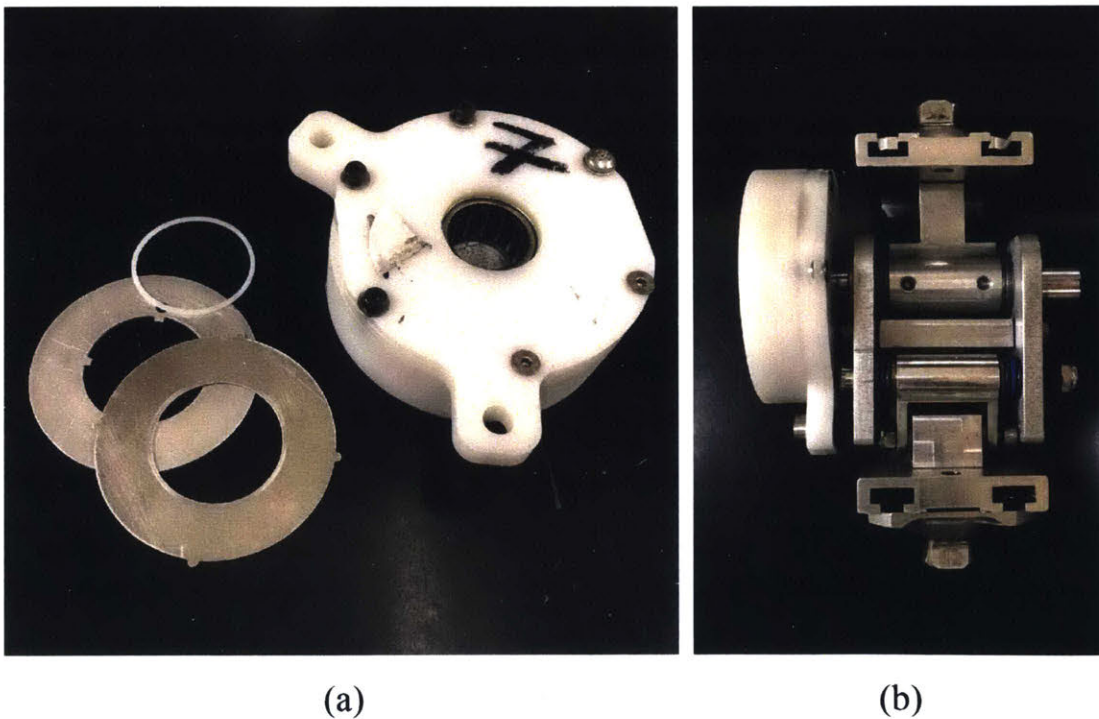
(a) Photograph of a stacked disks architecture damper, the rotor and stator disks, and the disk spacer that controls the gap thickness. (b) Photograph of the damper in the knee prototype assembly.
